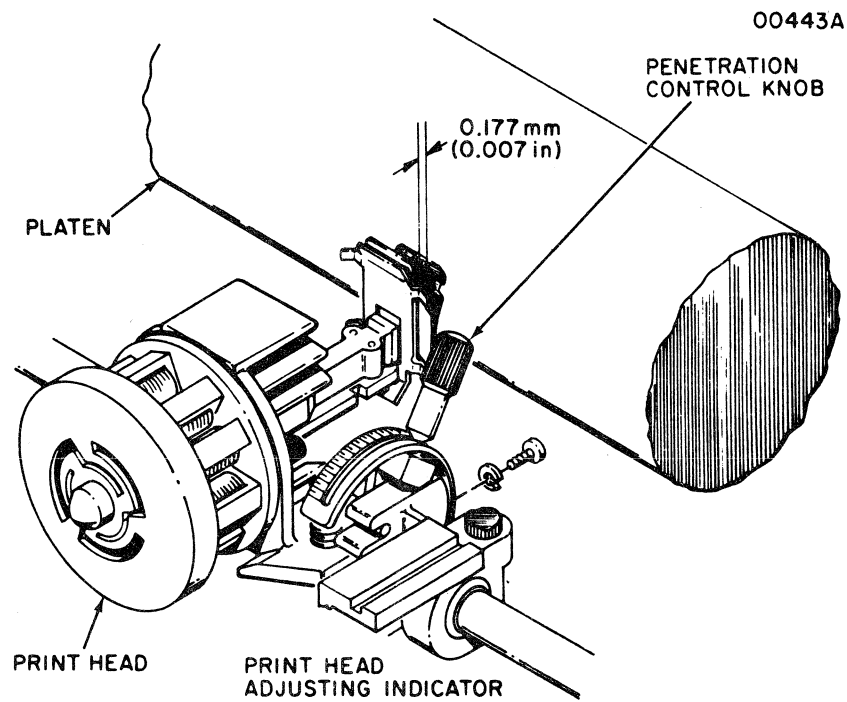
PENETRATION CONTROL ADJUSTMENT, PRINT HEAD ASSEMBLY
